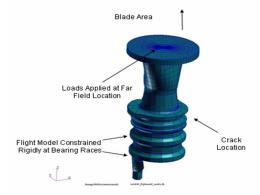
3D Boundary Element Model of Blade Tulip with Crack Site
